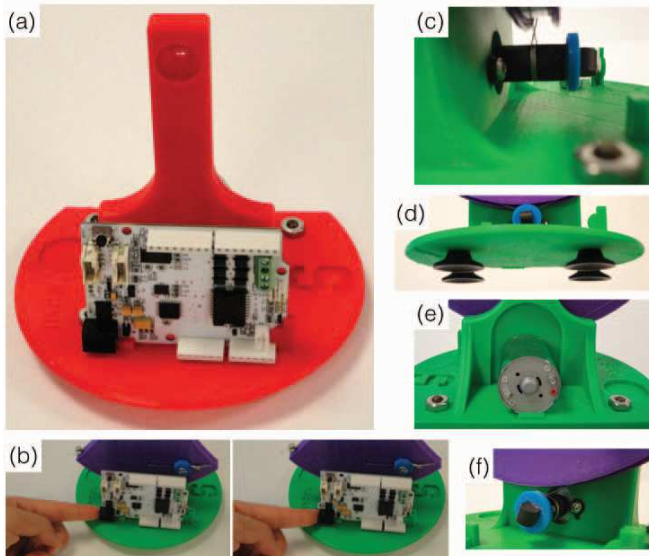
Hapkit 3.0 Base features: (a) Base (b) Board Snap-Fit (c) Drive-Wheel (d) Suction Cups (e) Motor Support (f) Motor Shaft Hole.
